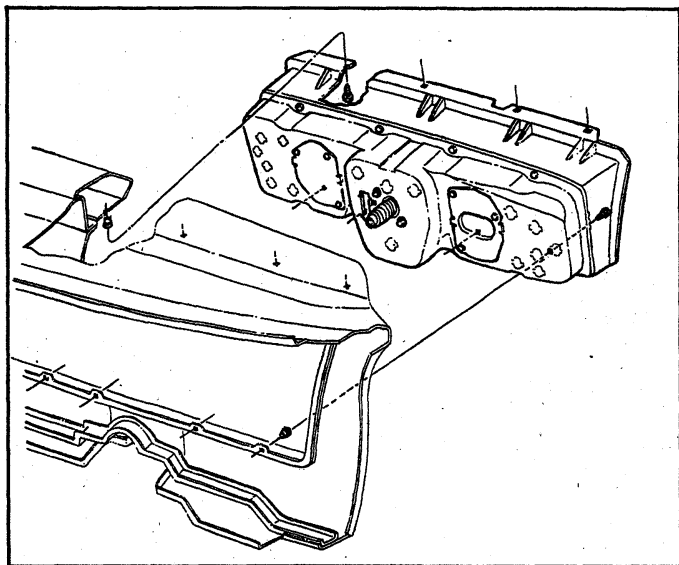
Instrument Cluster Installation -- Chevrolet
